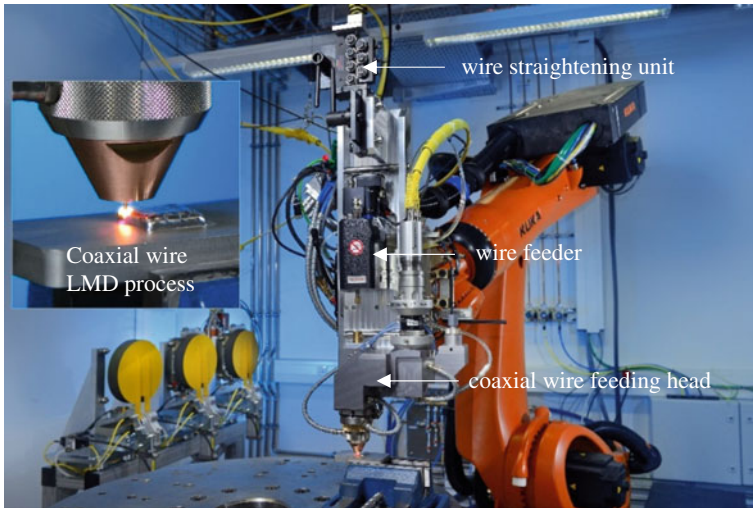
Coaxial wire feed processing head integrated in a robotic system
